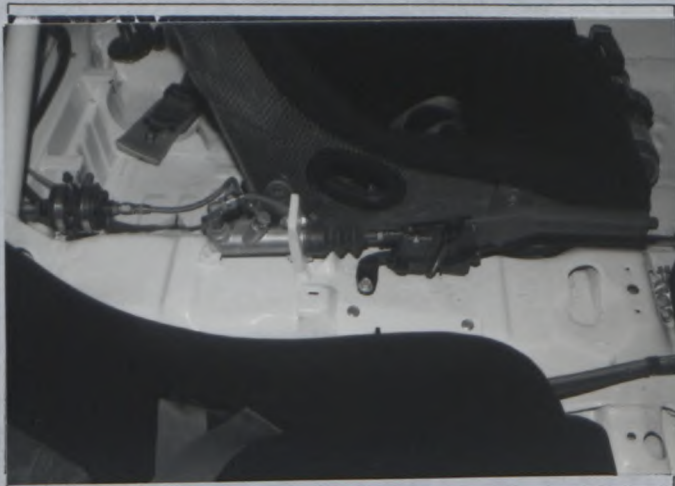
BRAKE BELL, FRONT AND REAR, TYPE A
